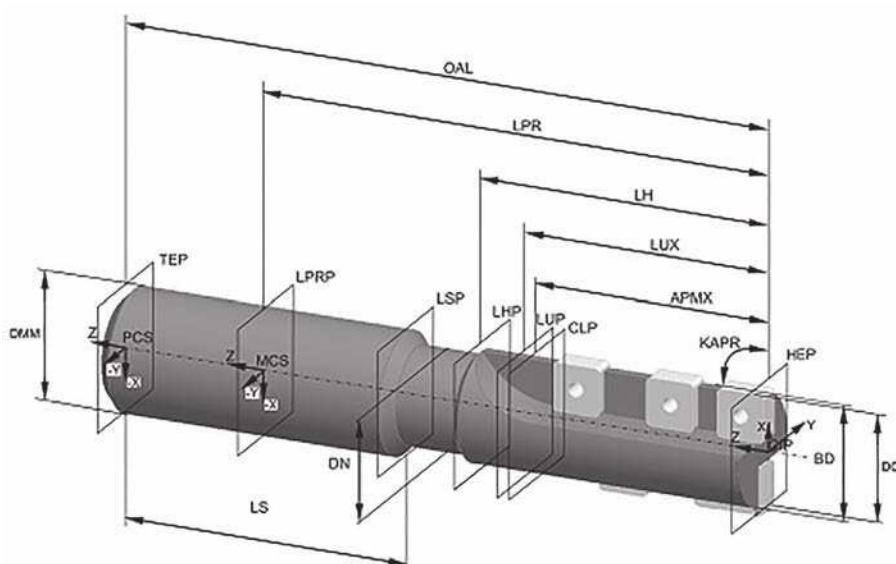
Assembled multiple rows, non-centre cutting end mill
